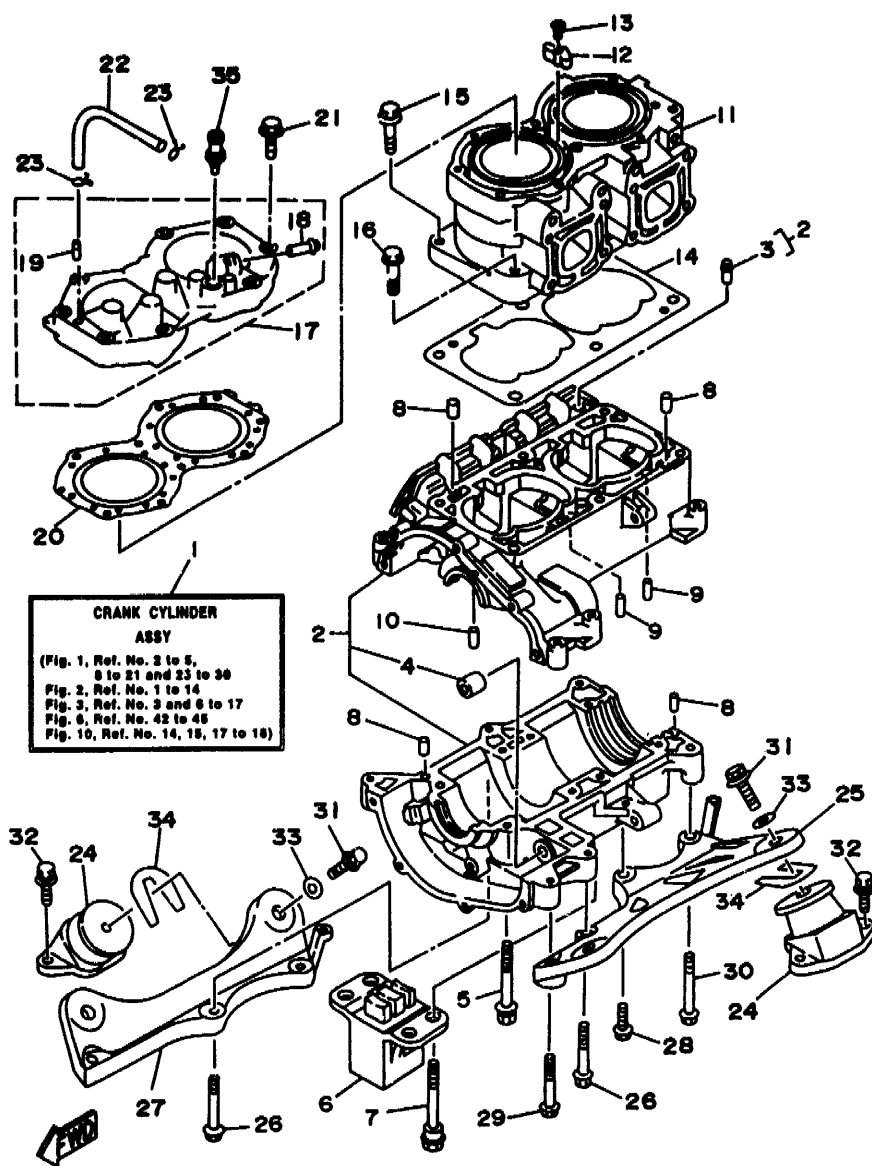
CYLINDER. CRANKCASE	A4, A5	FIG. 21	CONTROL CABLE	E7
